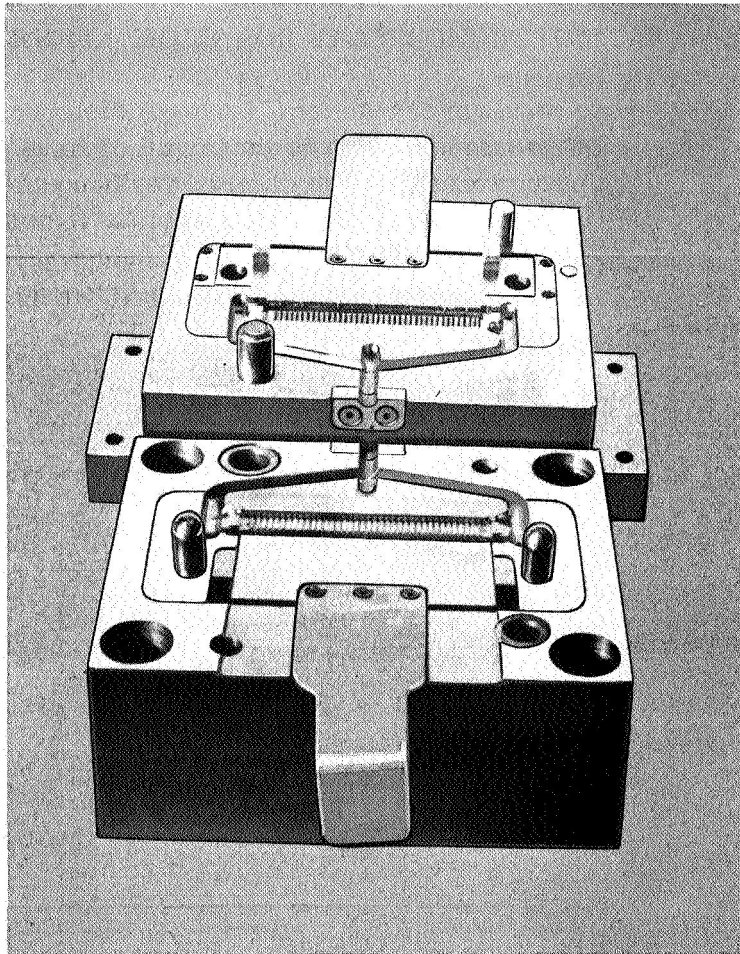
MOLD FOR FLAT CONDUCTOR CABLE PLUG
